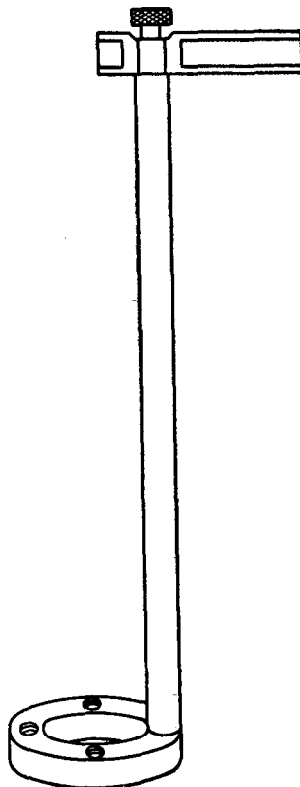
LENGTH BAR ASSEMBLED TO LARGE RADIUSSED JAW AND BASE TO FORM HEIGHT GAUGE
